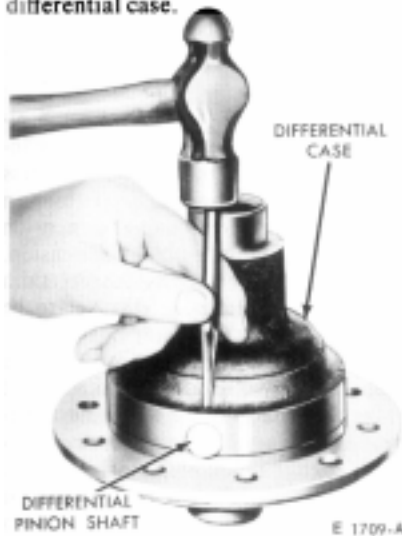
Removing Differential Pinion Shaft Lock Pin
